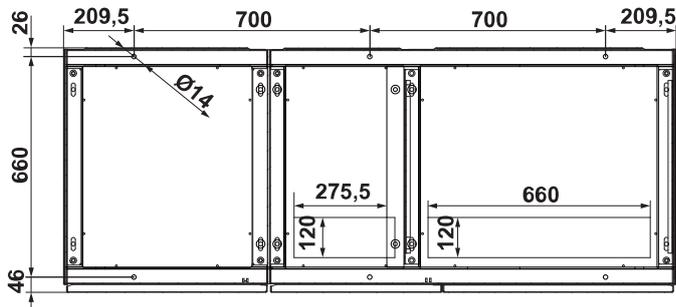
DETAIL FLOOR FIXING & OUTPUT WINDOWS FOR CONNECTION : A-A
